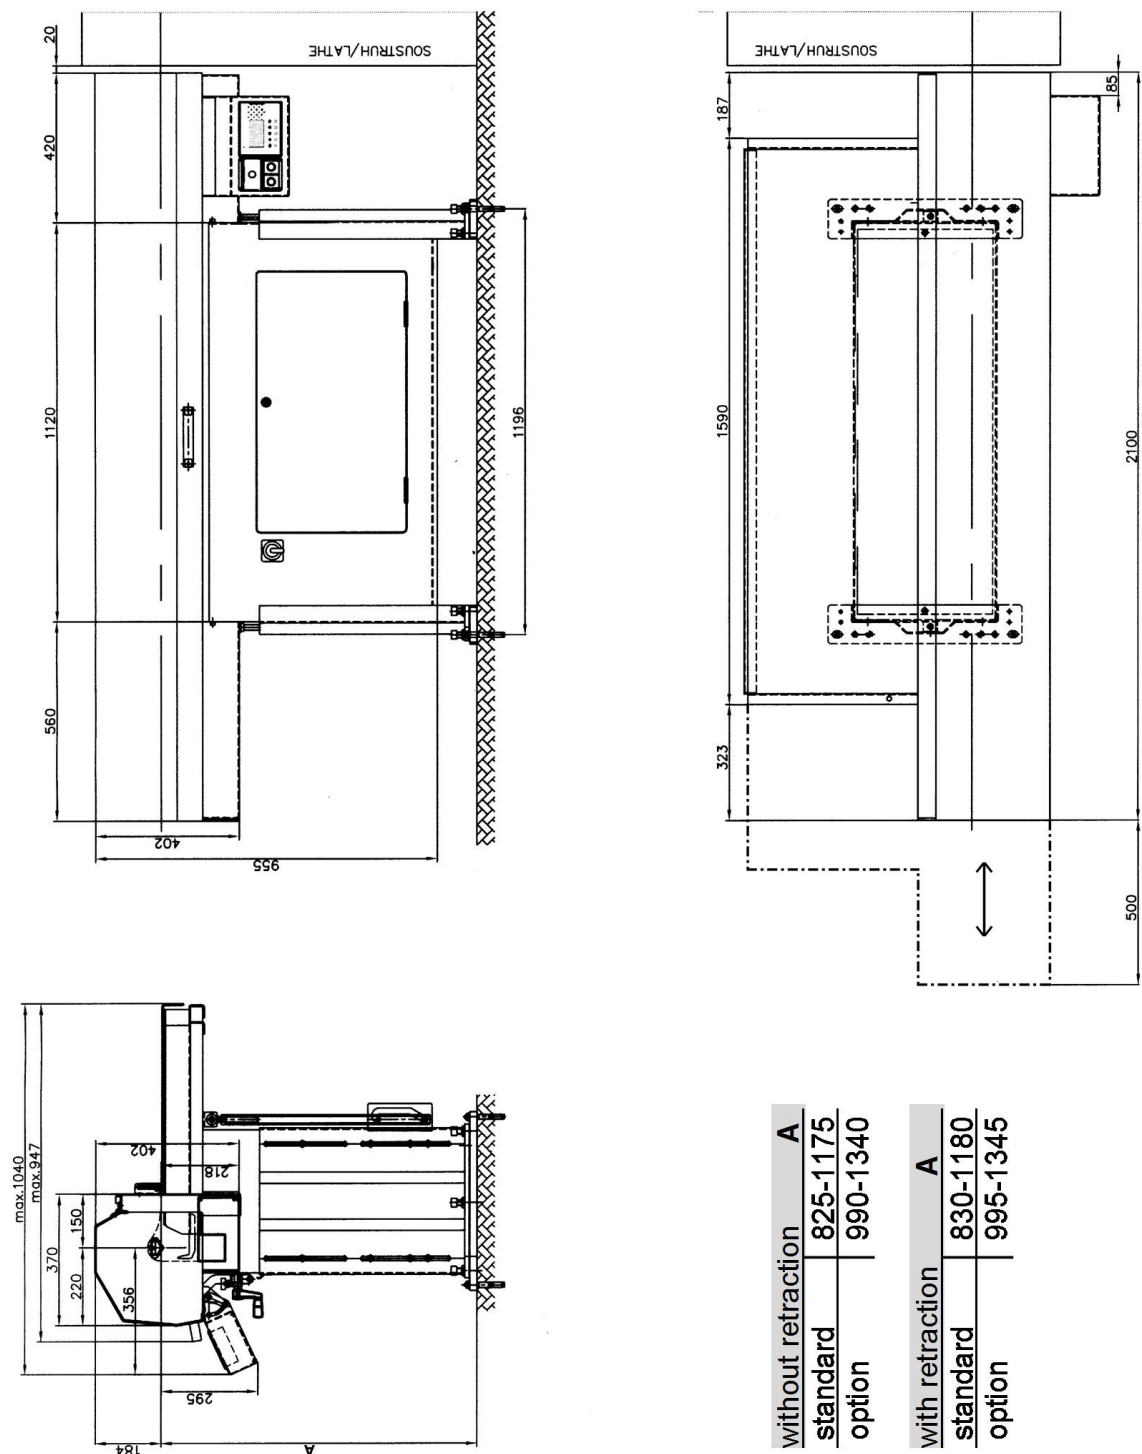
Main Dimensions of the Barfeeder – Axial Retraction Mechanism
